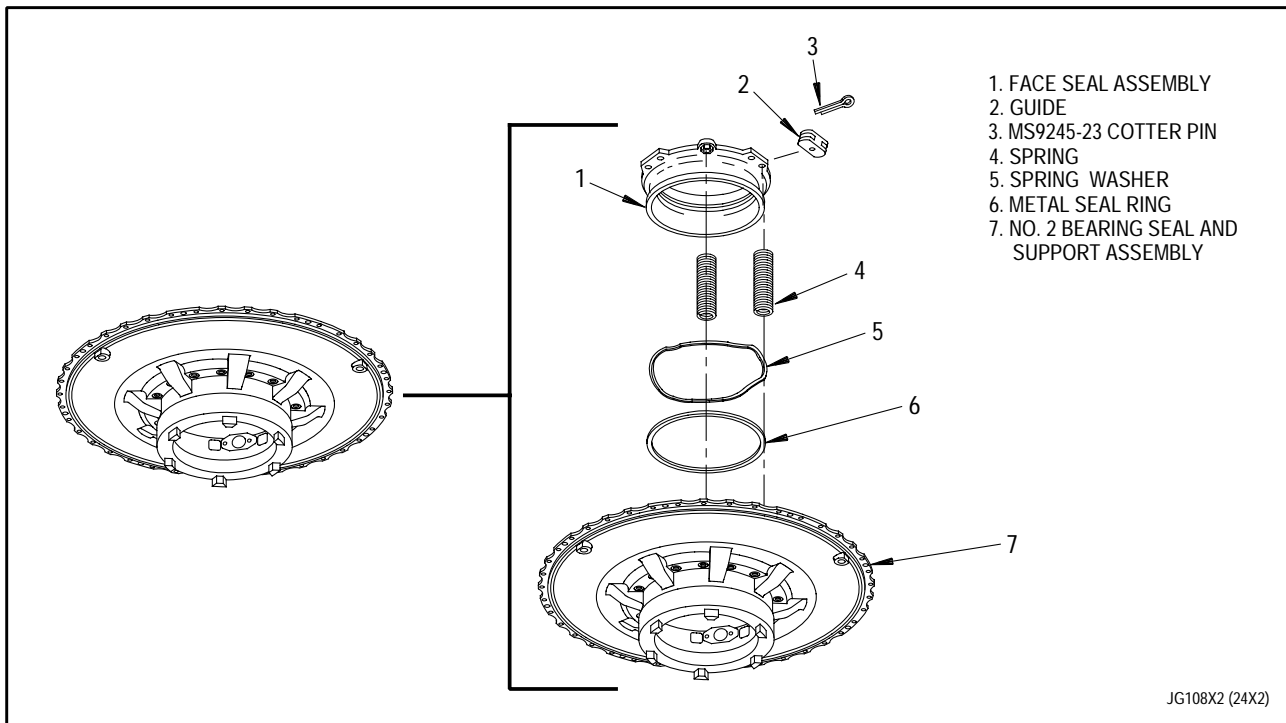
No. 2 Bearing Front Seal Assembly - Disassembly
